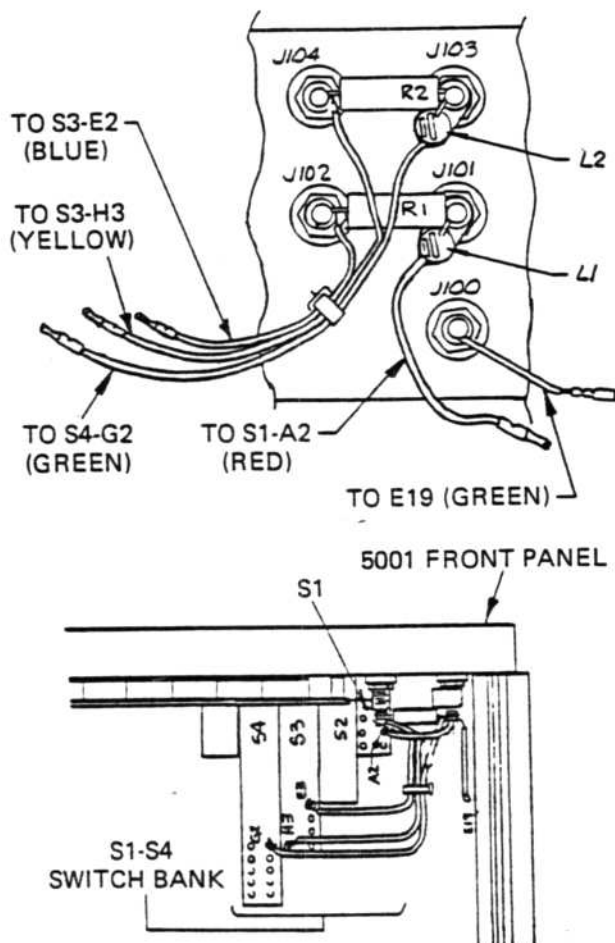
Front Panel Input Terminal Disconnection with Detailed Top View
